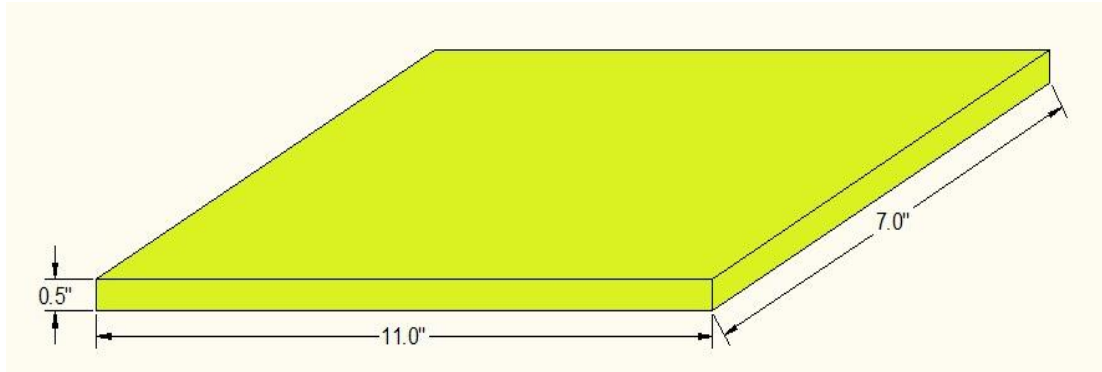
Single BioPCM block used in the Ceiling and Floor
